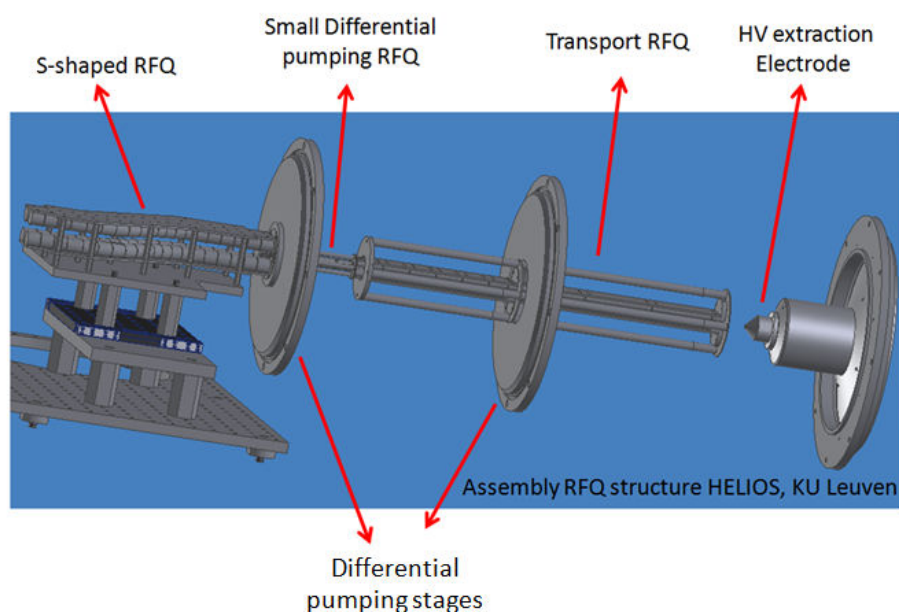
Drawing of the proposed assembly of the RFQ ion guides for REGLIS³ at S³ which will be mounted and tested in the IGLIS lab at KU Leuven.
